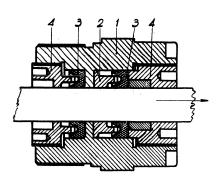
RECUPERATOR STUFFING BOX - ASSEMBLY
